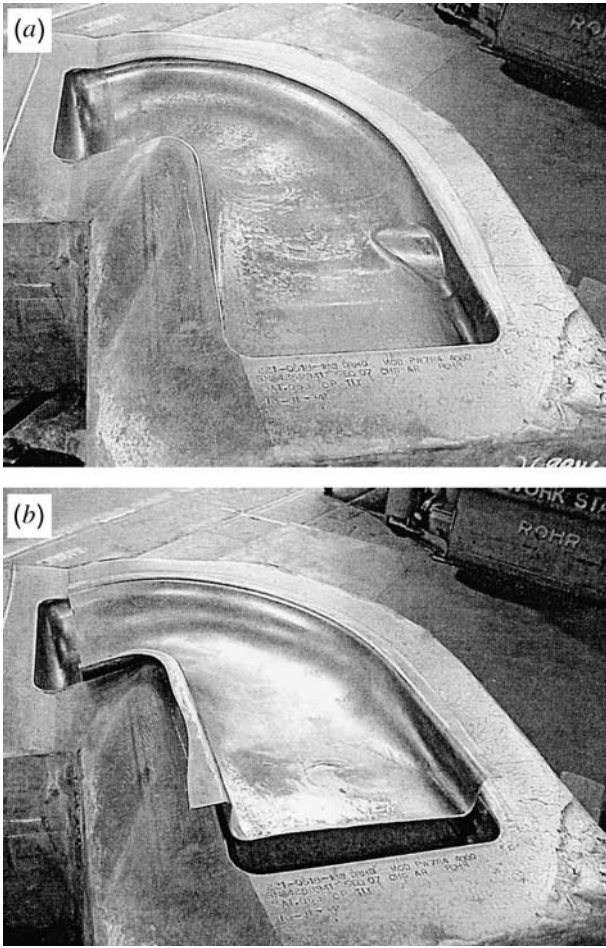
Corners of part: (a) tool, and (b) part to be formed by the tool.
